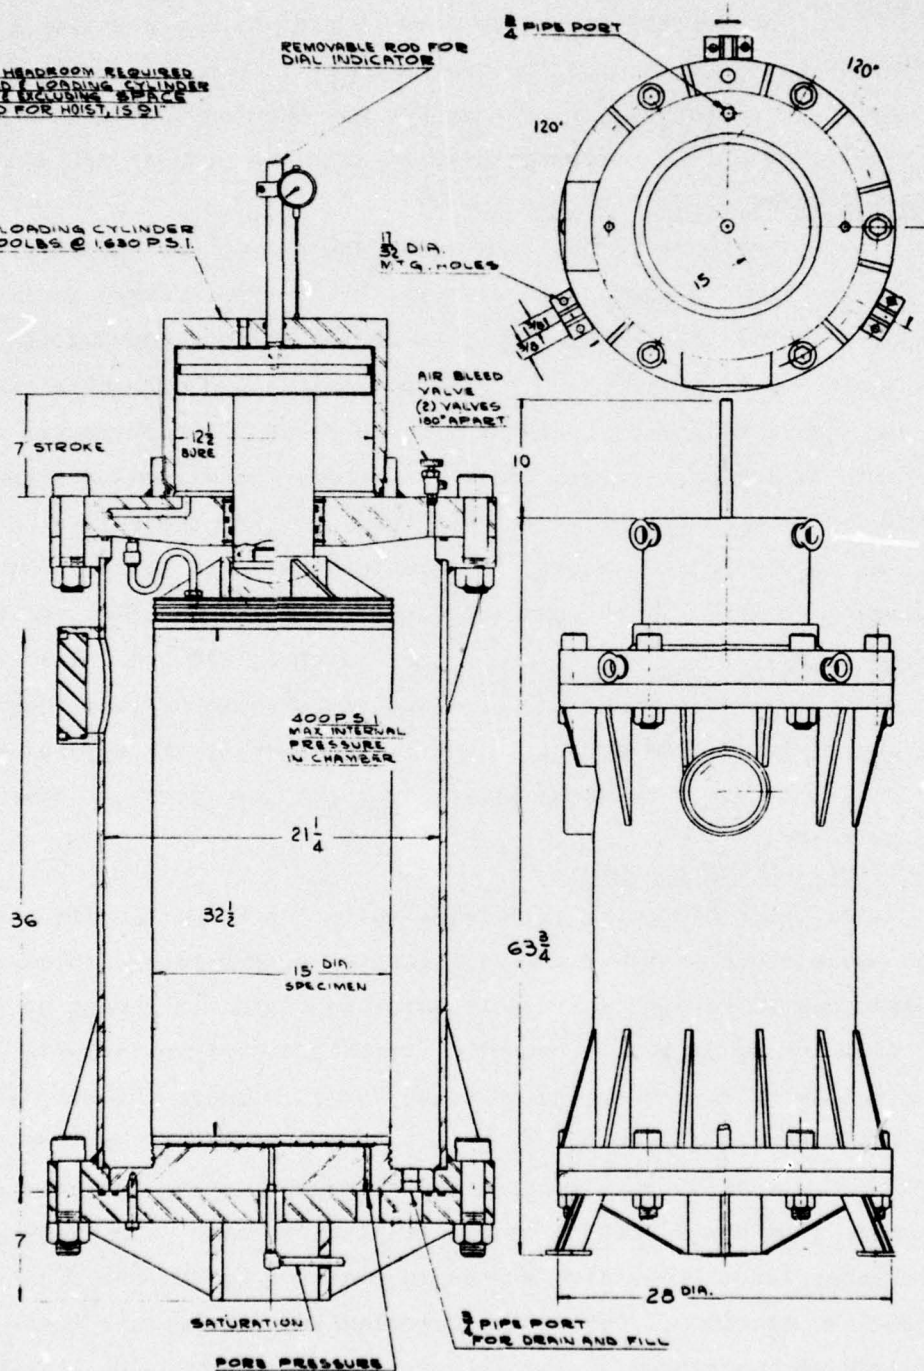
Triaxial apparatus for 12-in.-diam specimens manufactured by Soiltest, Inc., for the South Atlantic Division Laboratory
